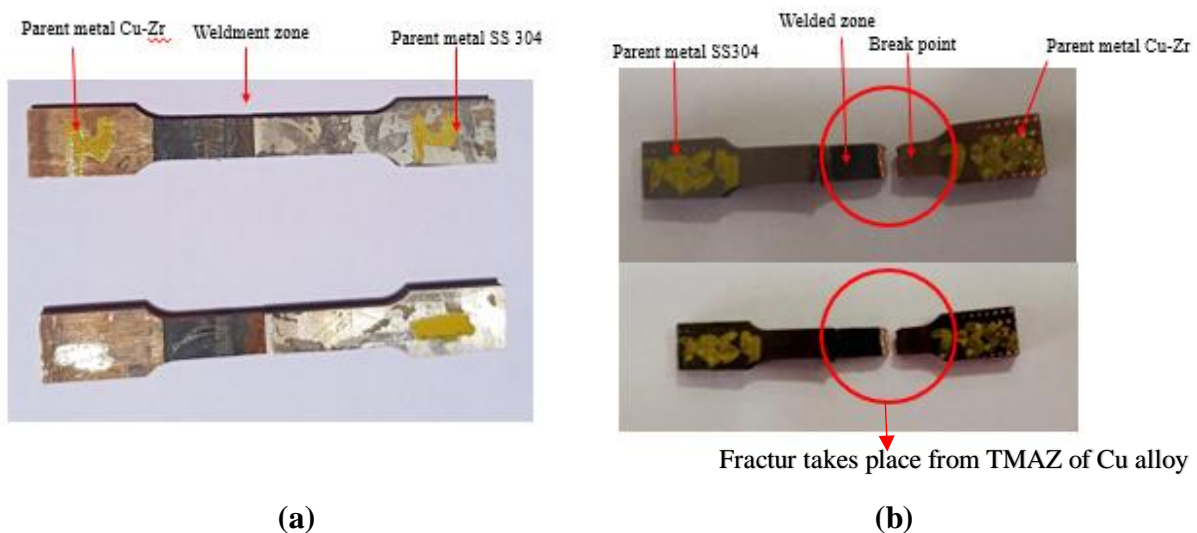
(a) Cross weld tensile test specimen before test
